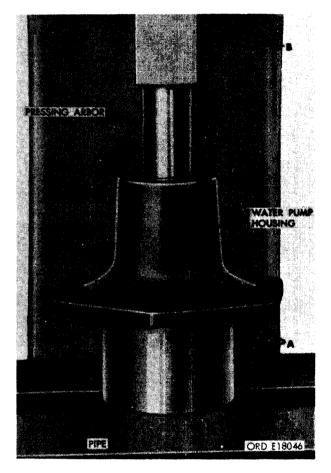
REMOVING WATER SEAL FROM WATER PUMP HOUSING.
